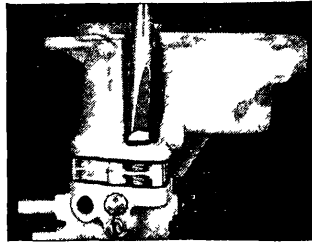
Install body castings and tighten screws securely. Don't forget lock washers
